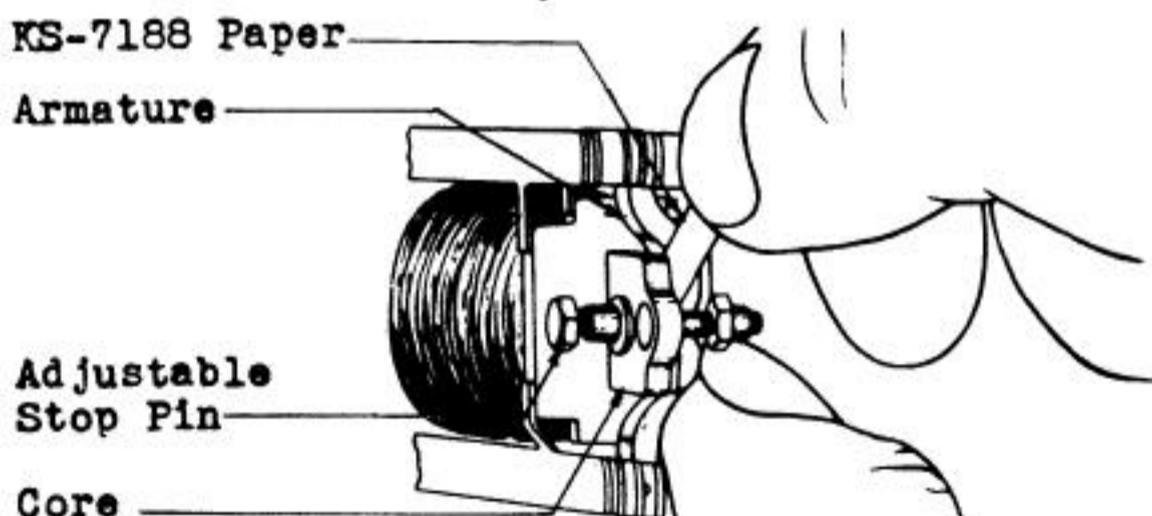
Method of Cleaning Armature and Adjustable Stop Pin on F Type Relays
